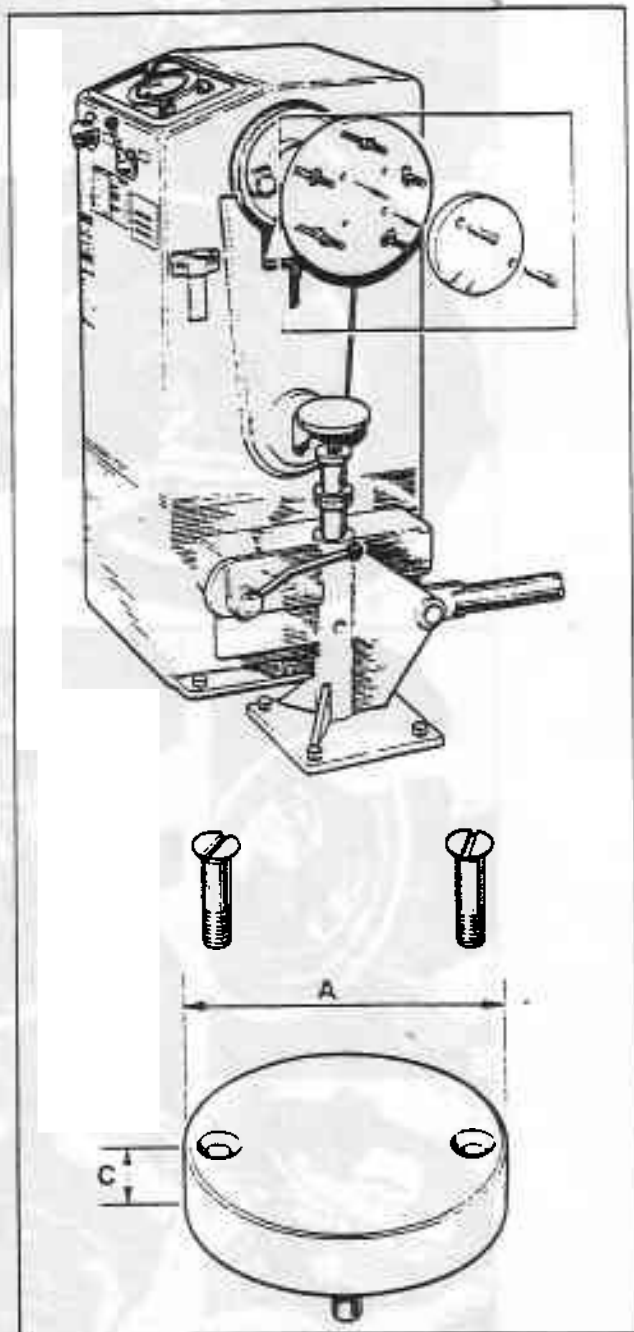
Vertical type of balancing machine with adapter for spigotted wheels
